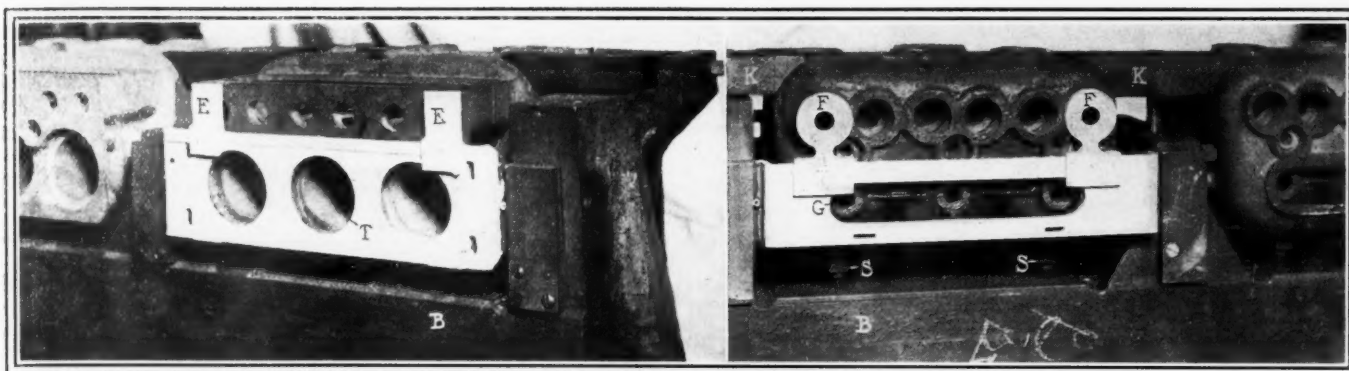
Templet fitted to determine proper location of base of Marmon cylinder casting on milling machine
